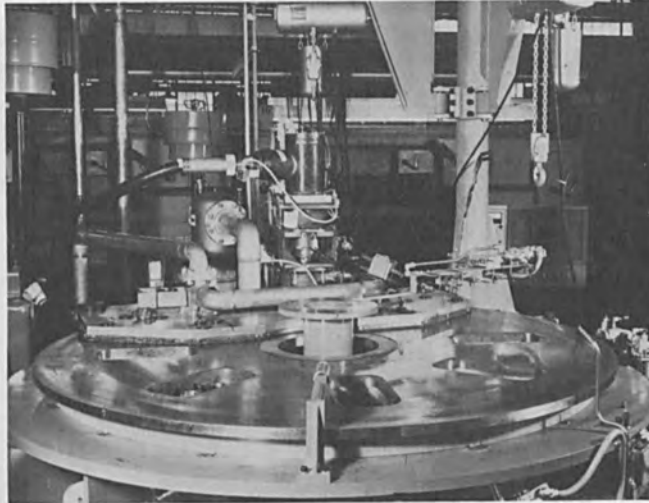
View of Soft Vacuum Electron Beam Welder Rotary Table & Sliding-Seal Plate.
